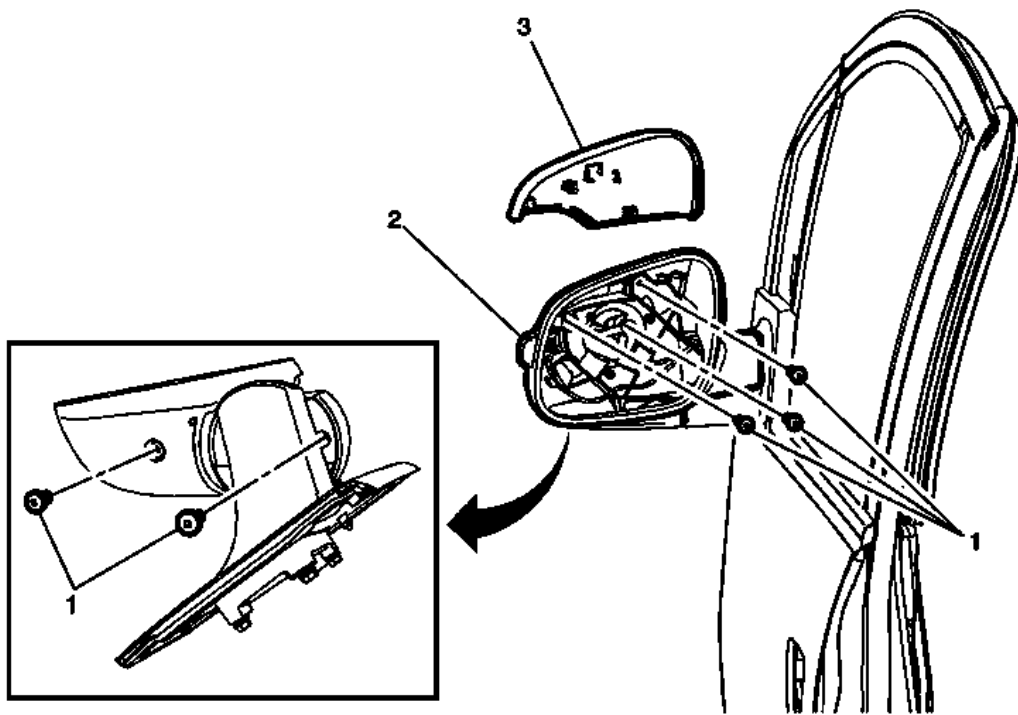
Outside Rearview Mirror Housing Cover (with Side Turn Signal Lamp)
